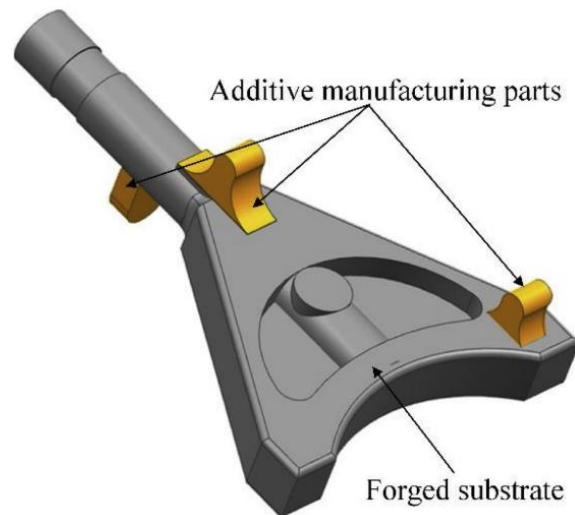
Schematic of an aircraft landing gear fabricated by forging and additive manufacturing (Liu, X. et al., 2020)
